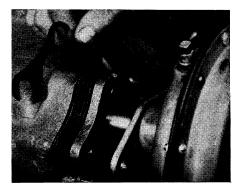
Add or remove shims from pack under sleeve to obtain correct adjustment of shift fork pads in shift collar
